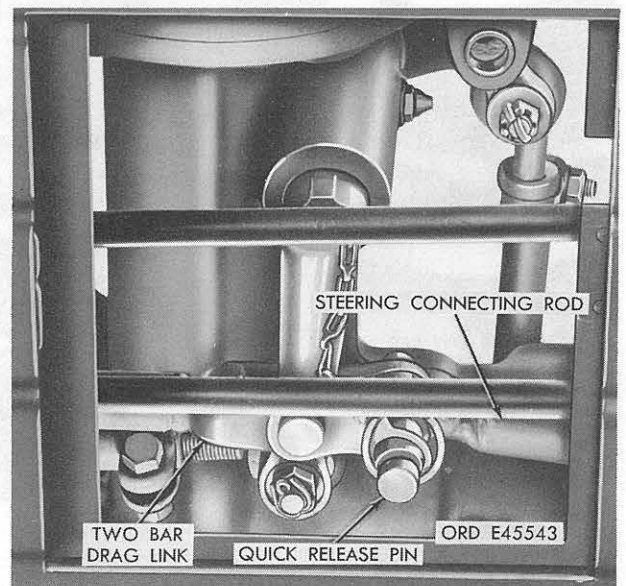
Steering access opening lid removed showing four-wheel steering connected.
